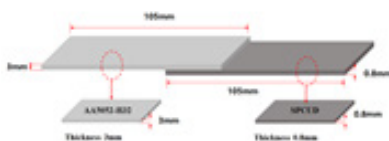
Schematic diagram of the size of Friction Stir Spot Welding specimens
